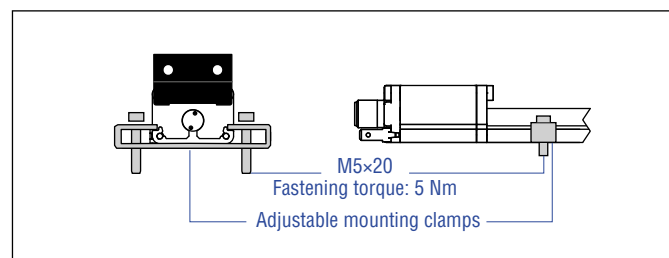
EL with mounting clamps with cylinder screw M5×20 (part no. 403 508)
